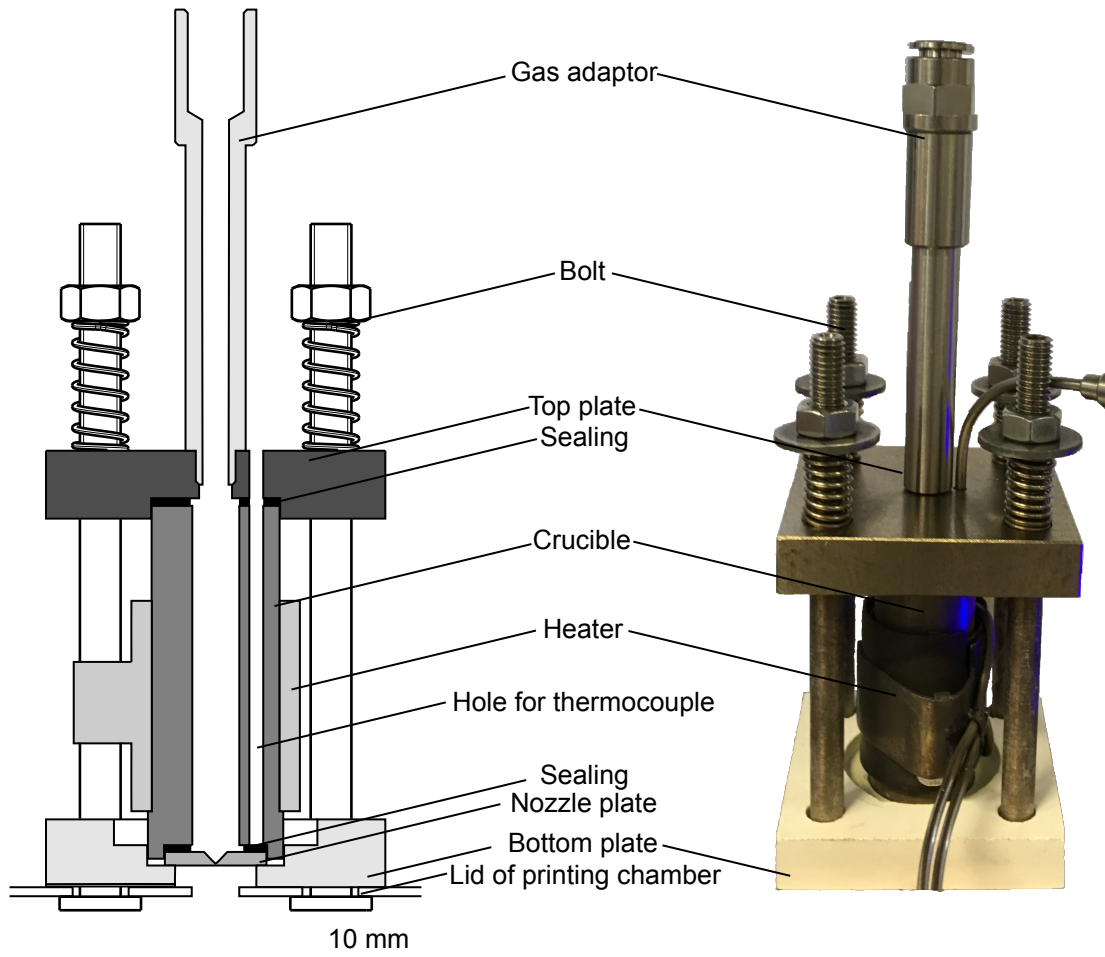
Middle section of CAD model (left) and picture (right) of the print head. The crucible, which contains the molten aluminium, is clamped between the top and the bottom plate by four bolts. On the bottom it is closed by the nozzle plate and on the top it is closed by the gas adaptor. A heater surrounding the crucible is controlled to set a desired temperature that is measured by a thermocouple plugged into a hole through the top plate and the crucible.
